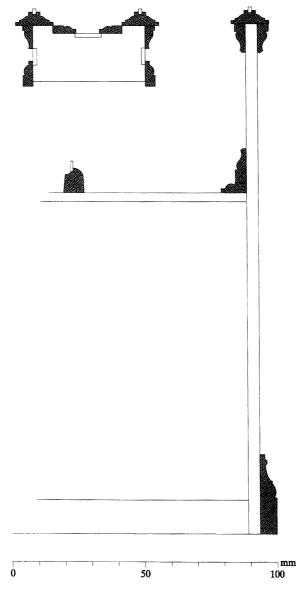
Schematic representation of the case mouldings, the jackrail section, and the bridge section at the position of the c² bridge pin.
